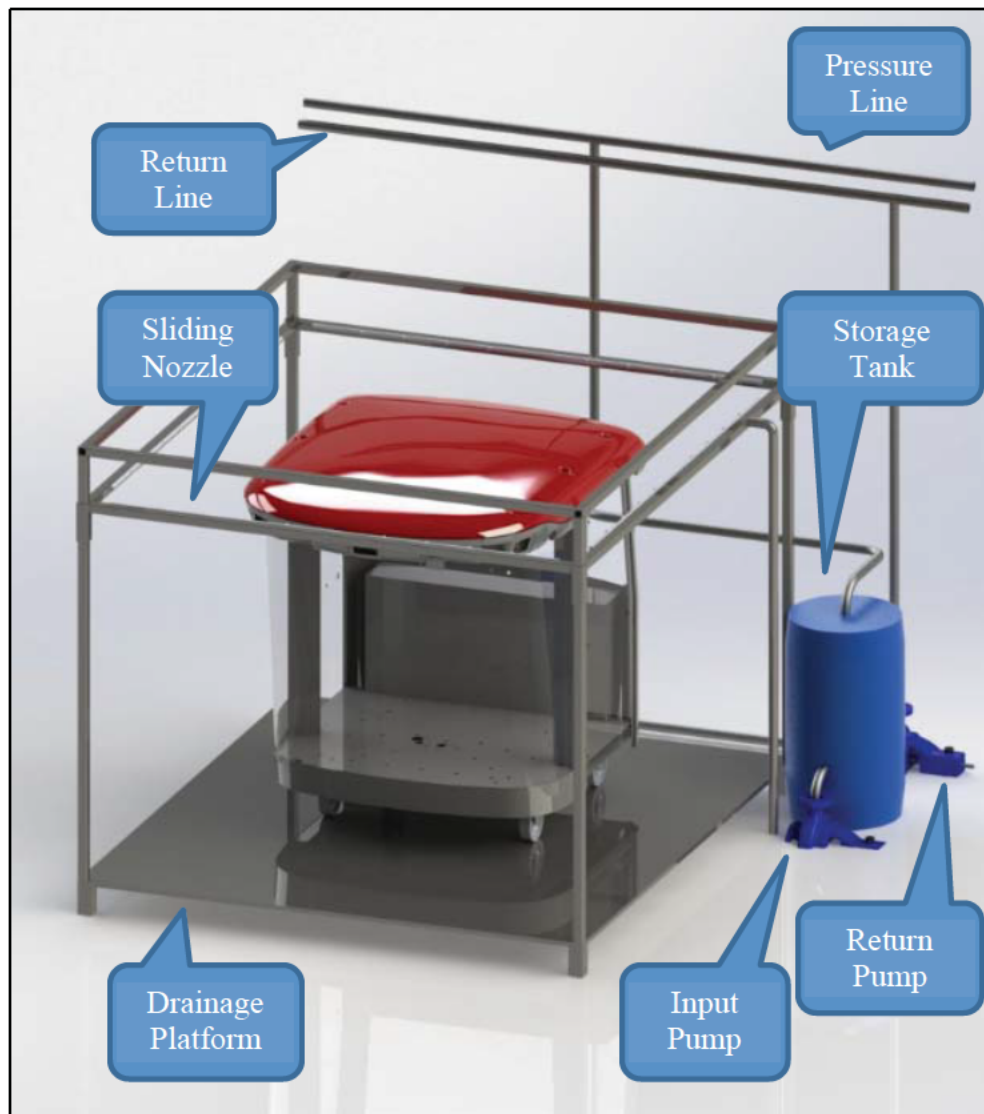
A basic CAD model of the storage tank design idea, highlighting the use of existing pipes to supply the pressure and return flows, the windrower cab placed on a draining platform, a storage tank to collect water and apply additional pressure/fluorescent tracer to the water before being pump to the return line (shielding would be required in order to contain sprayed water).
